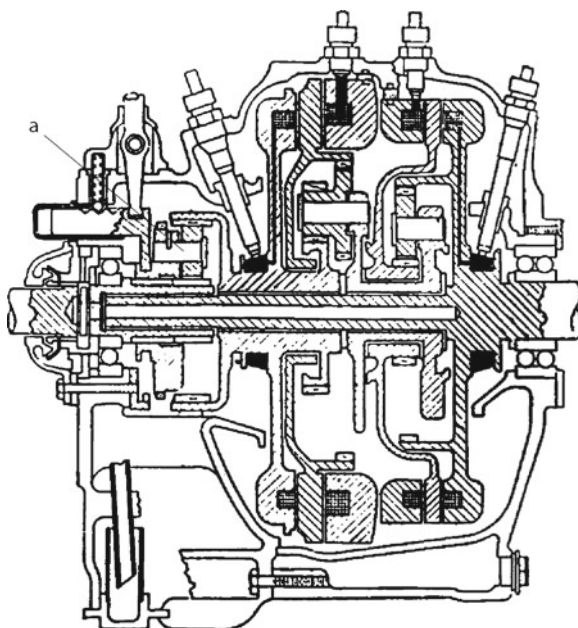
Semi-automatic gearbox produced by Cotal starting from 1934. The different elements of planetary gears are braked by electromagnets. The reverse gear is engaged manually (from Genta and Morello 2009)
